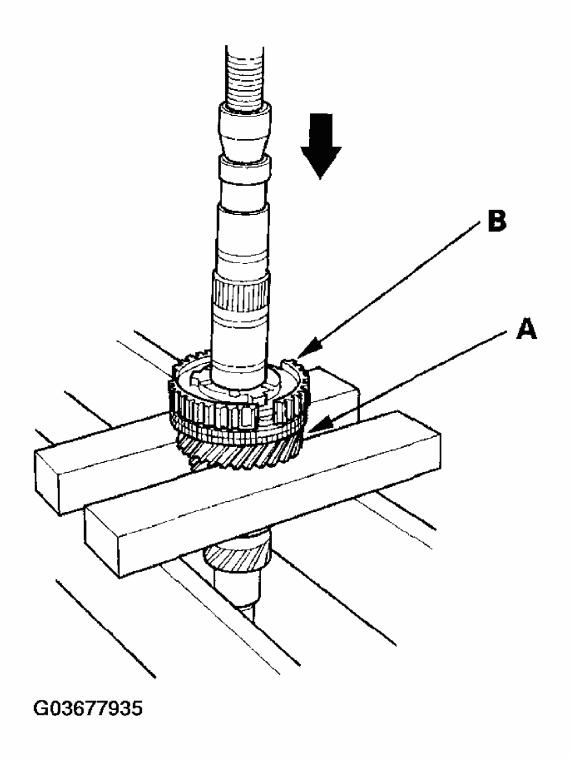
Removing Mainshaft Out Of Third/Fourth Synchro Hub Courtesy of AMERICAN HONDA MOTOR CO., INC.
